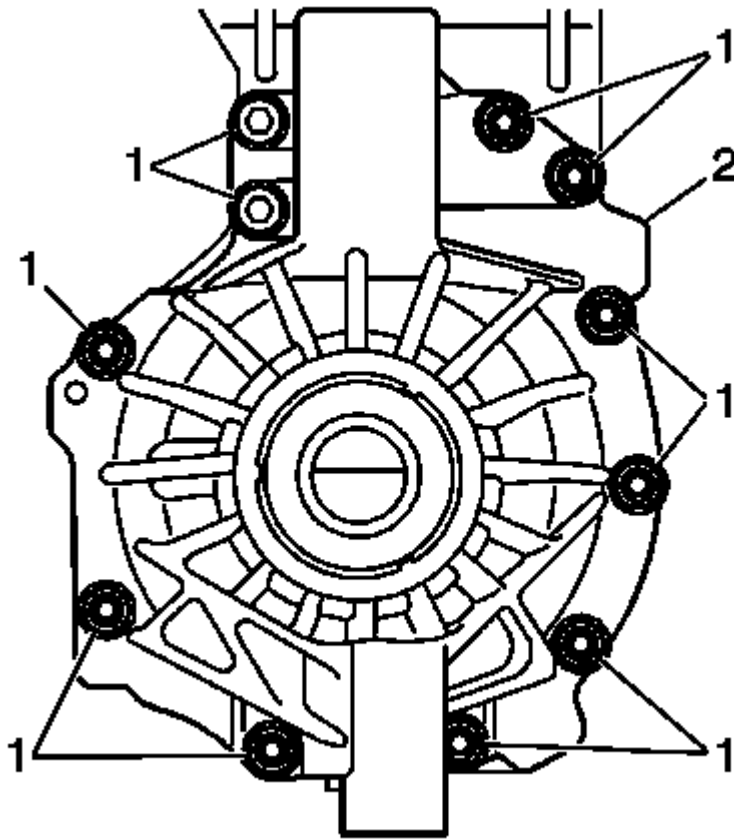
Identifying Differential Housing Bolts & Right-Hand Limited Slip Differential Housing
